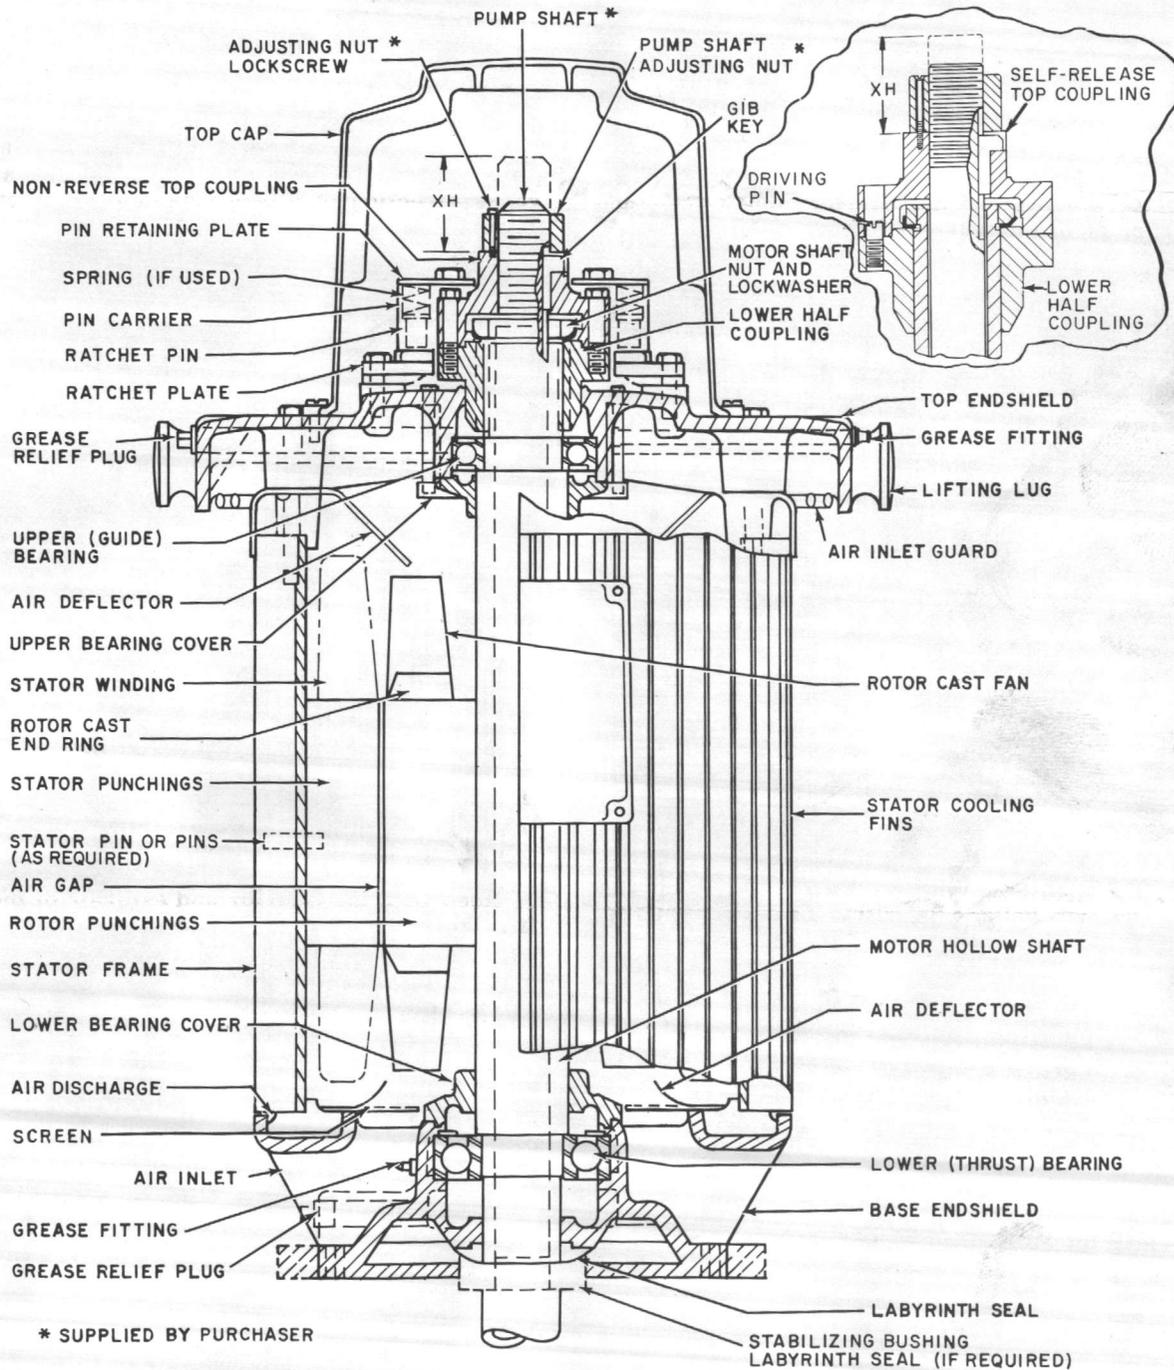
Typical high-thrust, hollow-shaft motor with non-reverse coupling. Self-release type shown in inset.
